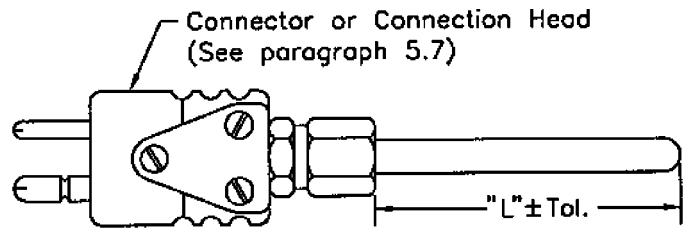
Sheathed Thermocouple Assembly with Connector or Connection Head (any Type Specified)
